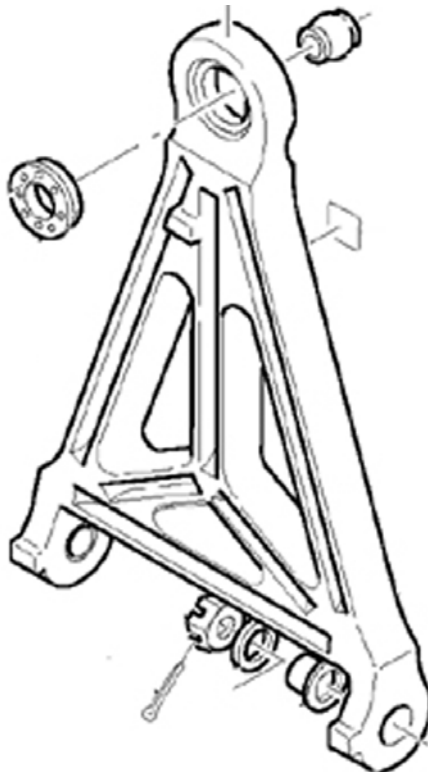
Longitudinal Torque Link Assembly (AH-64A/D)
